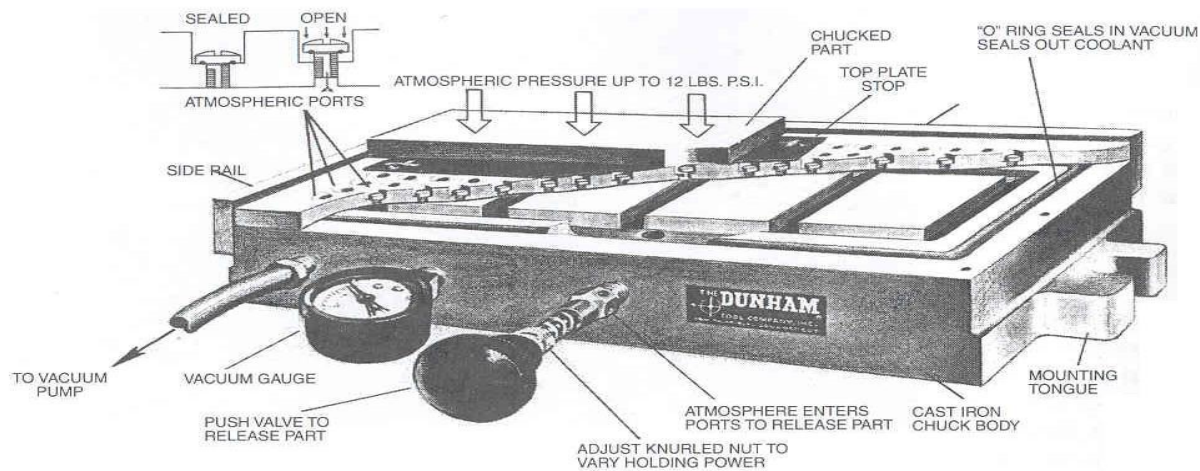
Cutaway view of a vacuum chuck. (Courtesy of Dunham Tool Company, Inc.)
